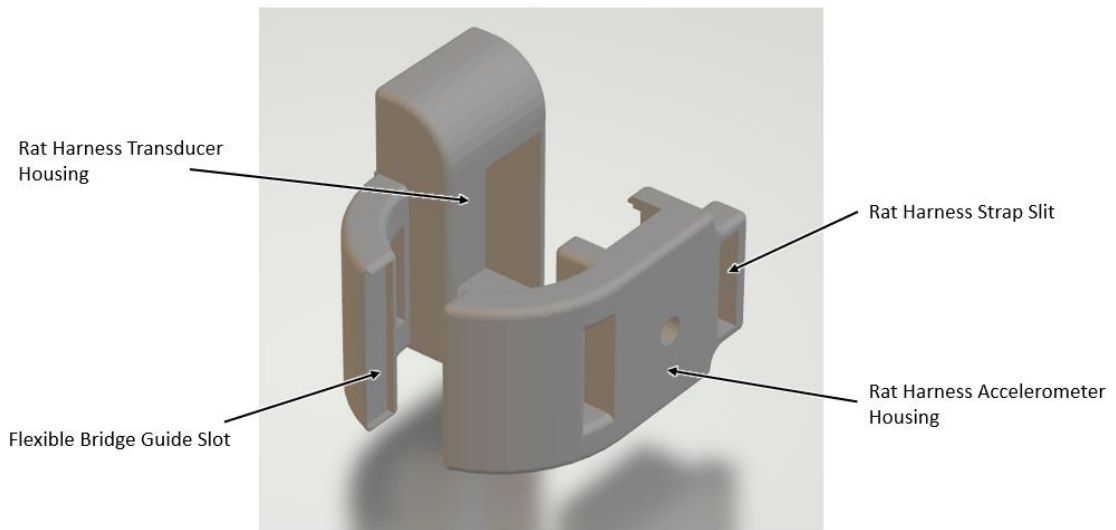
CAD representation of the 3D printed components of the animal harness prototype including the transducer housing (left) and the accelerometer housing (right)
